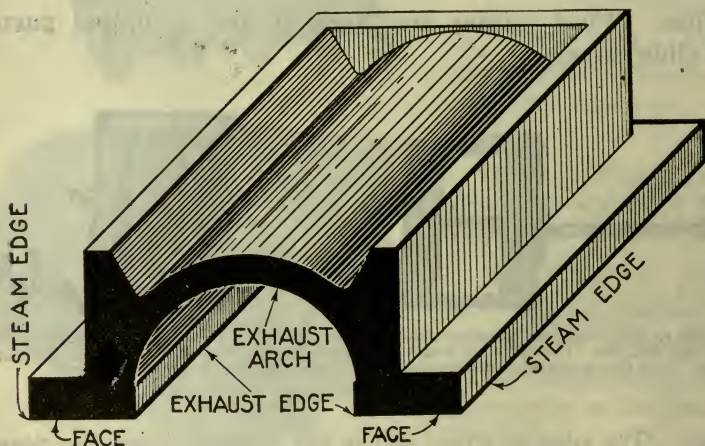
Sectional view of slide valve showing the principal parts. It is important to remember the names given in the figure.
